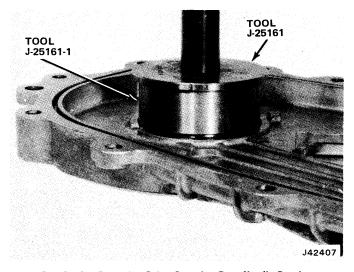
Removing Drive Sprocket Rear Needle Bearing
